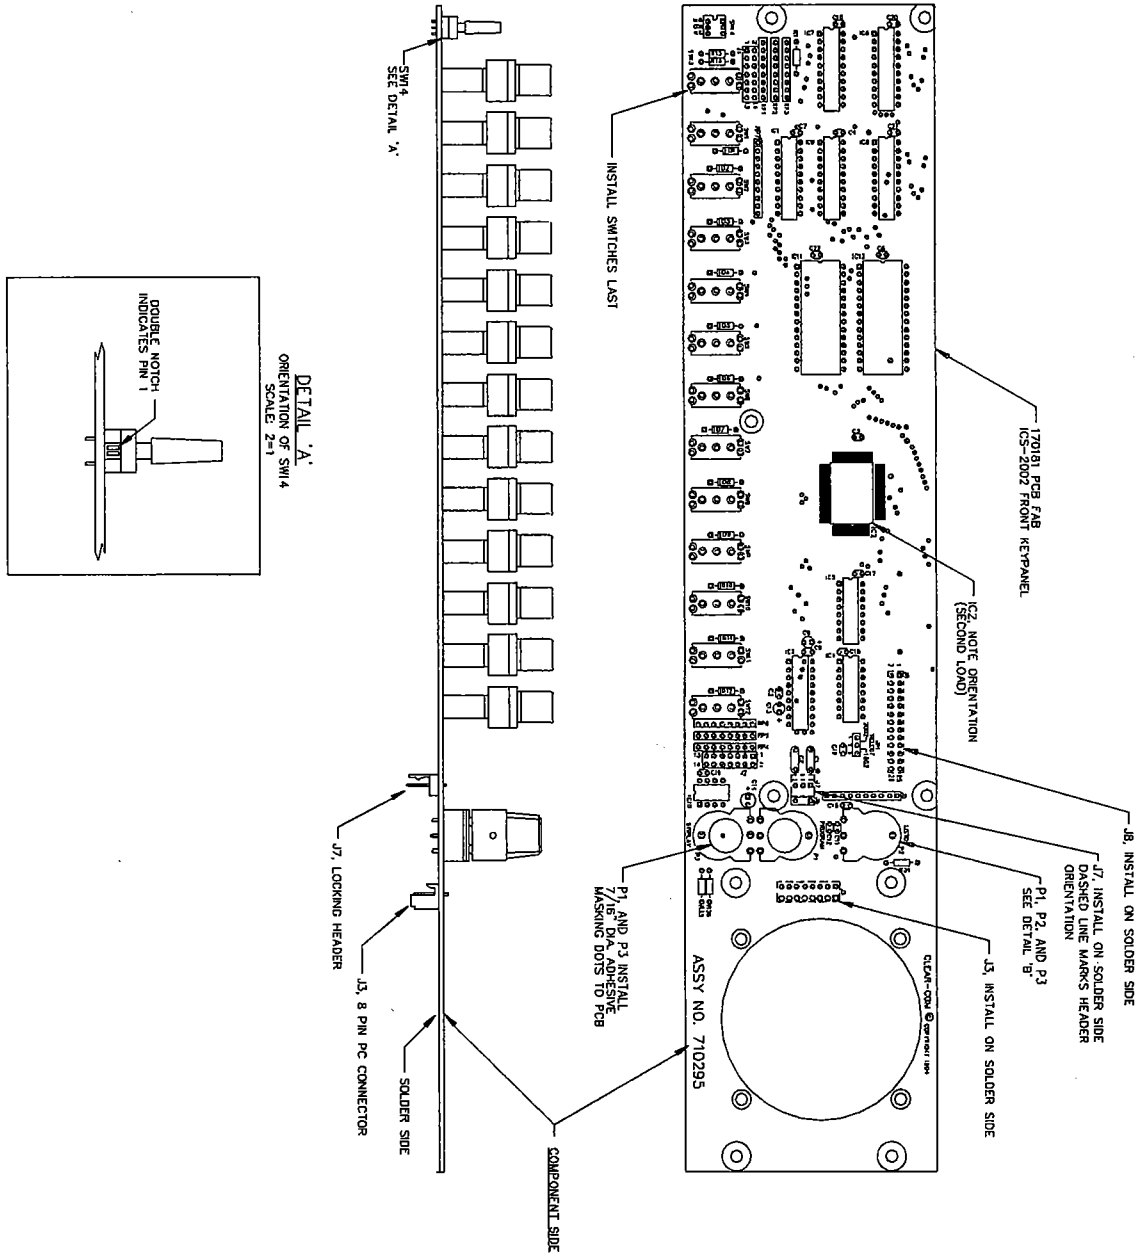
Assembly Drawing—ICS-2002 Front Panel PCB Rev. C
